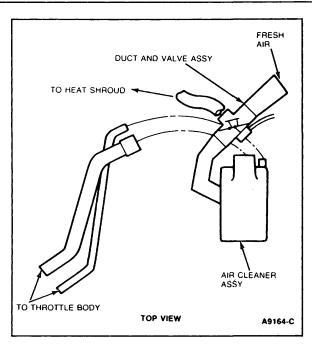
Typical Air Cleaner and Duct System — 2.9L EFI (Light Truck)
